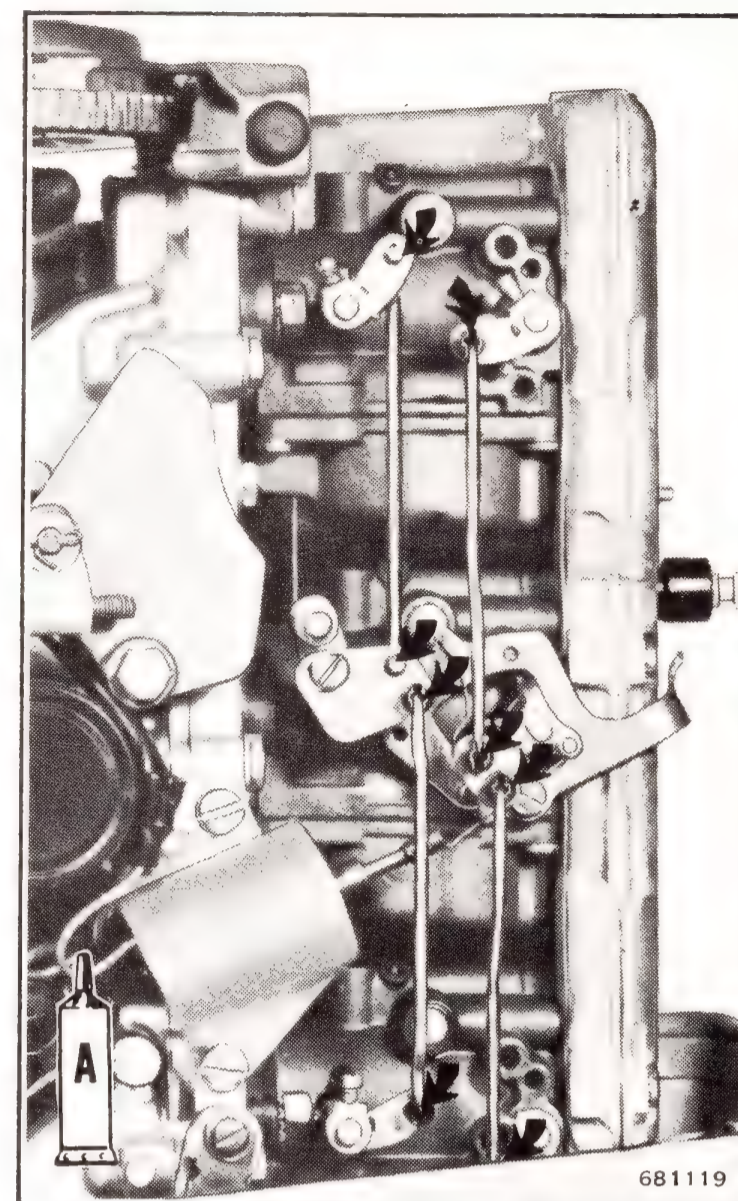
Throttle and Choke Shaft Springs and Linkage
